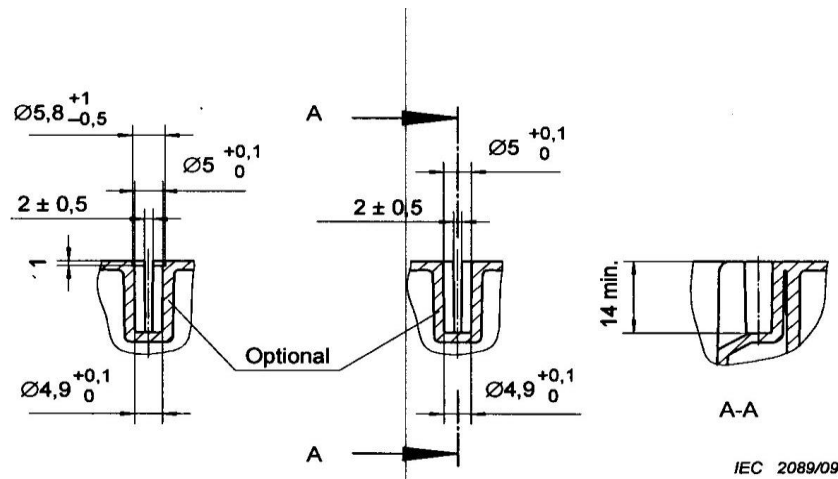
Recessed holes for terminal protection cover (detail “K”)
